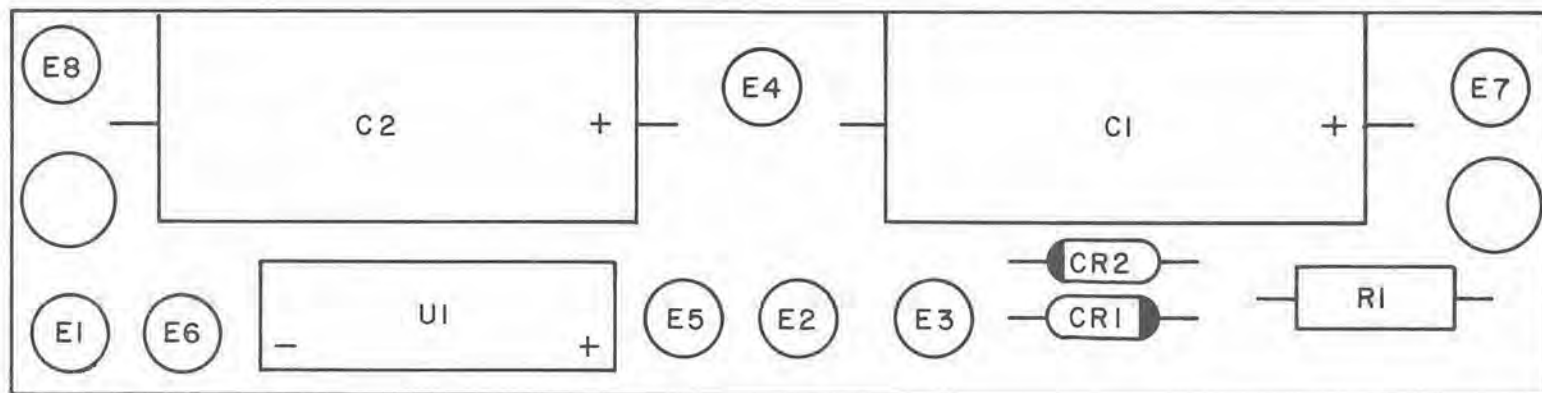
Rectifier Board A1 Parts Location Diagram
